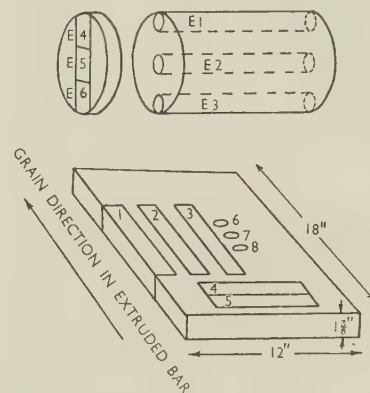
Tensile Test-Pieces Taken from Bar as Extruded and After Flattening.
